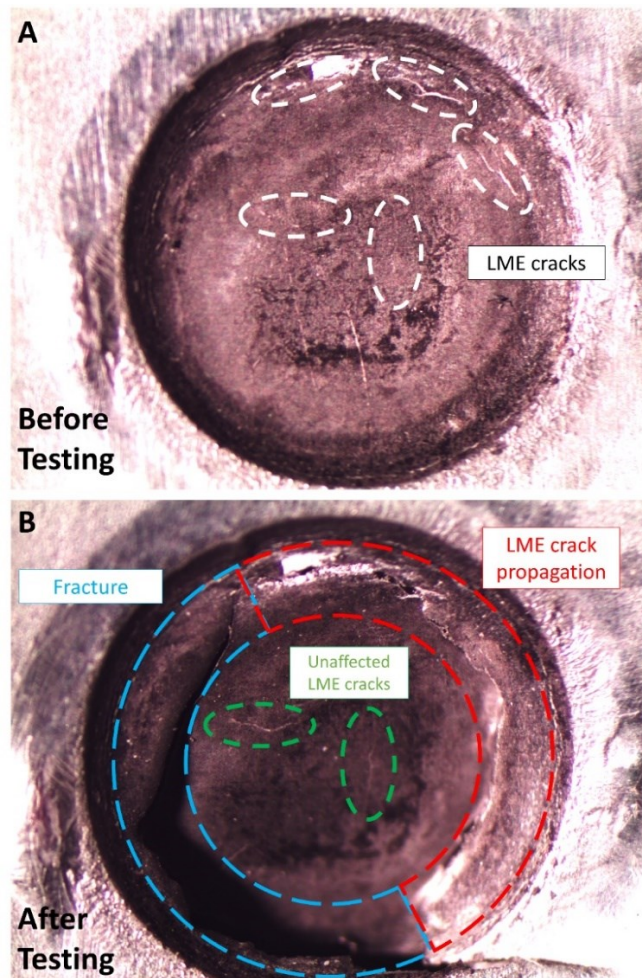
TRIP1100 weld surface (A) surface before lap shear testing showing the location of numerous LME cracks (B) weld surface after lap shear testing showing the growth and propagation of LME cracks in red, the fracture purely from lap shear testing in blue, and the LME cracks that were not involved with fracture in green
